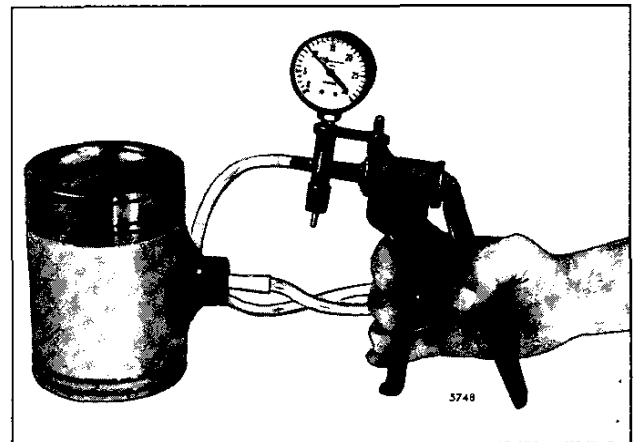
Checking Piston Pin Retainer for Proper Sealing Using Tool J 23987-01
